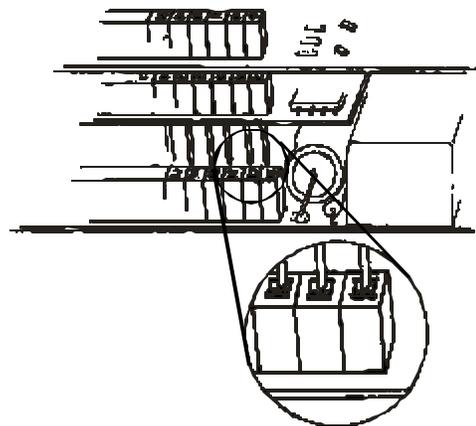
Lining Up The Pins Before Pressing The ProtoSound Boards Together
